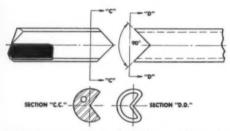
Second method of brazing carbide ends to drill fubes. Note shank end of drill end milled to a tongue shape with a 90° included angle.
